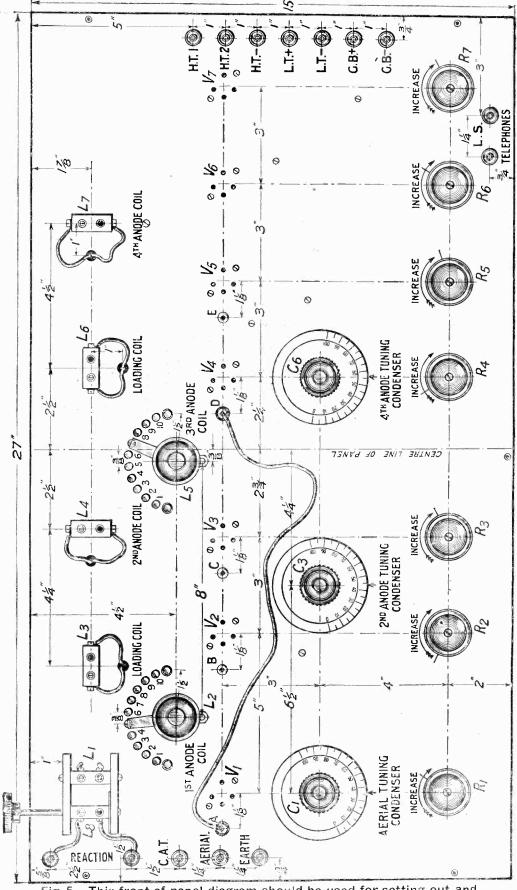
This front of panel diagram should be used for setting out and drilling the panel. Blue Print No. 85A.
